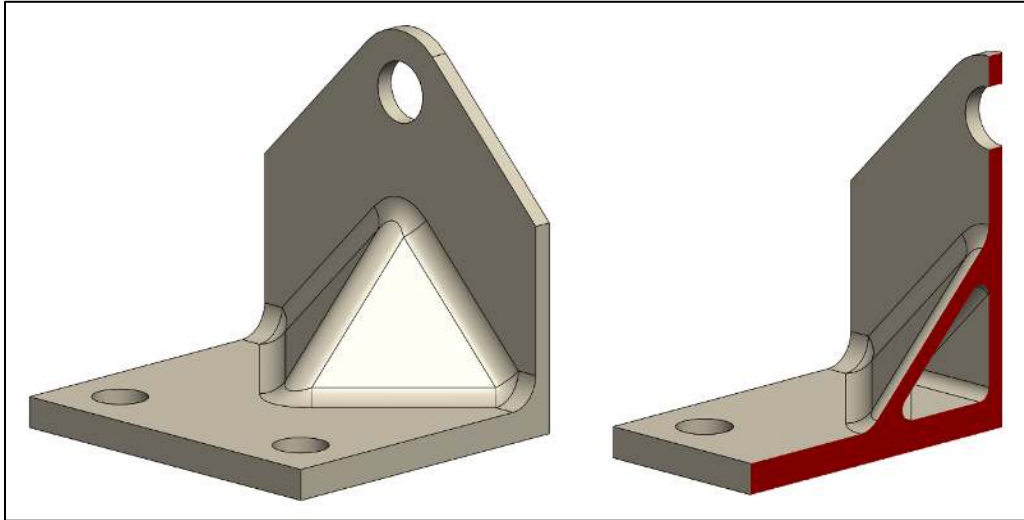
Example Bracket and Cross-Section Showing Hollow Gusset Feature
